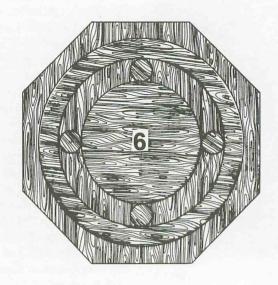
Turned components for lamp (Fig. 5-32) prior to assembly.
